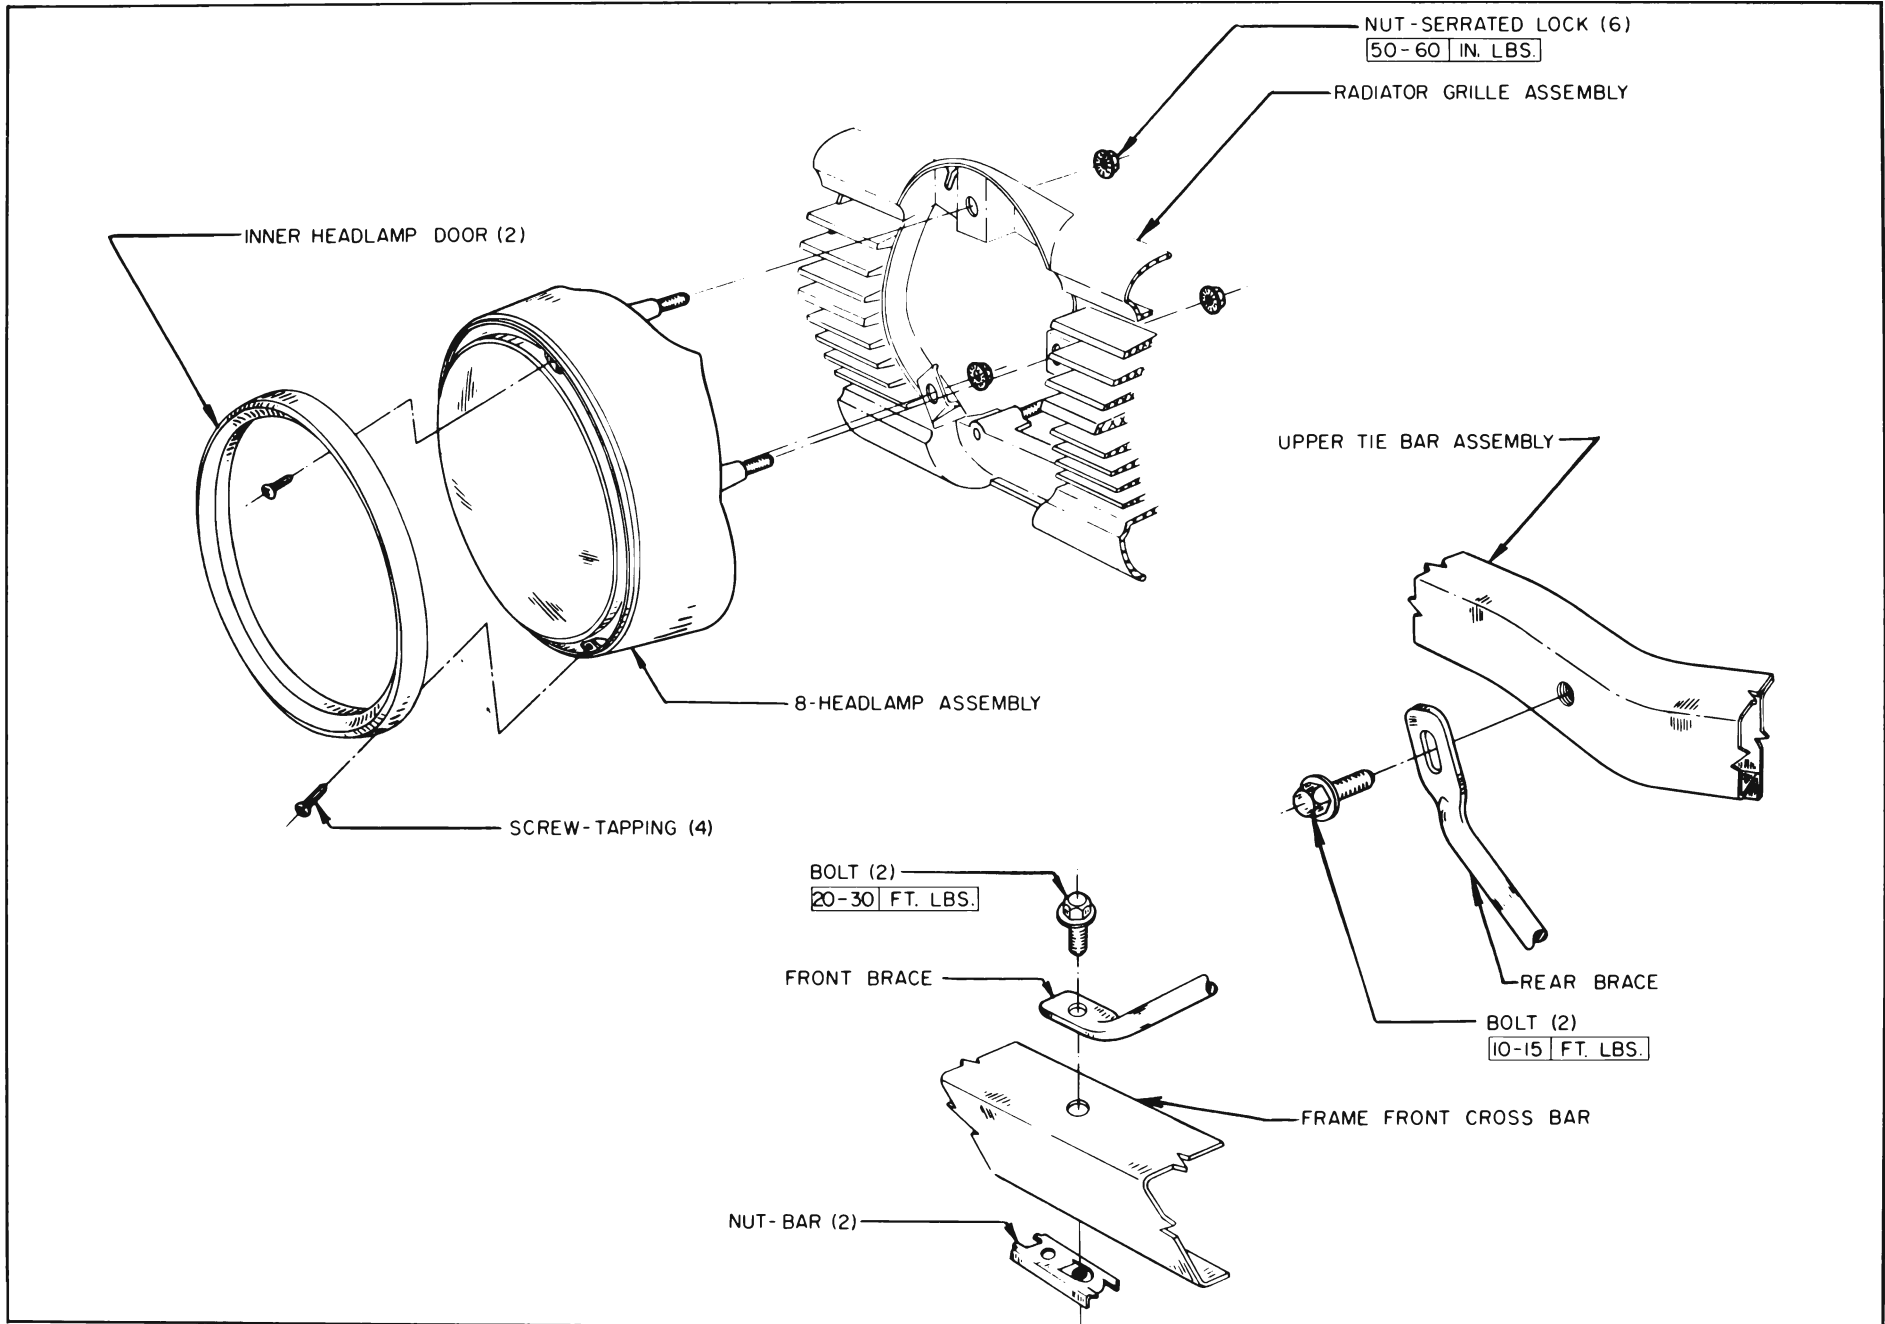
Grille and Front End Sheet Metal Illustration #2
